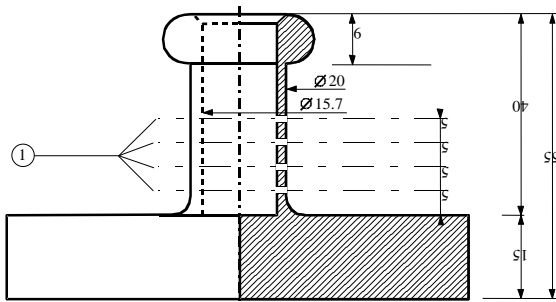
Hollow bronze cylinder, closed at one end; Plan and cut dimensions in mm
